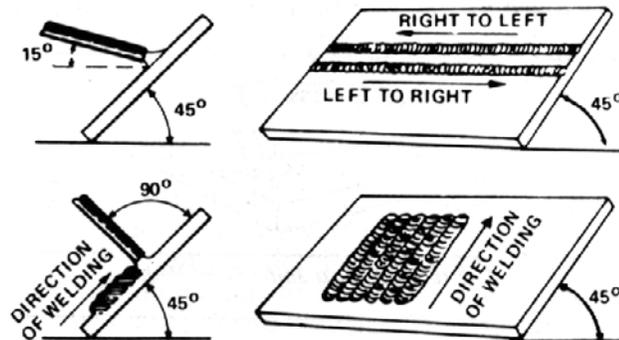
Horizontal Weld Beads - Inclined Plate
